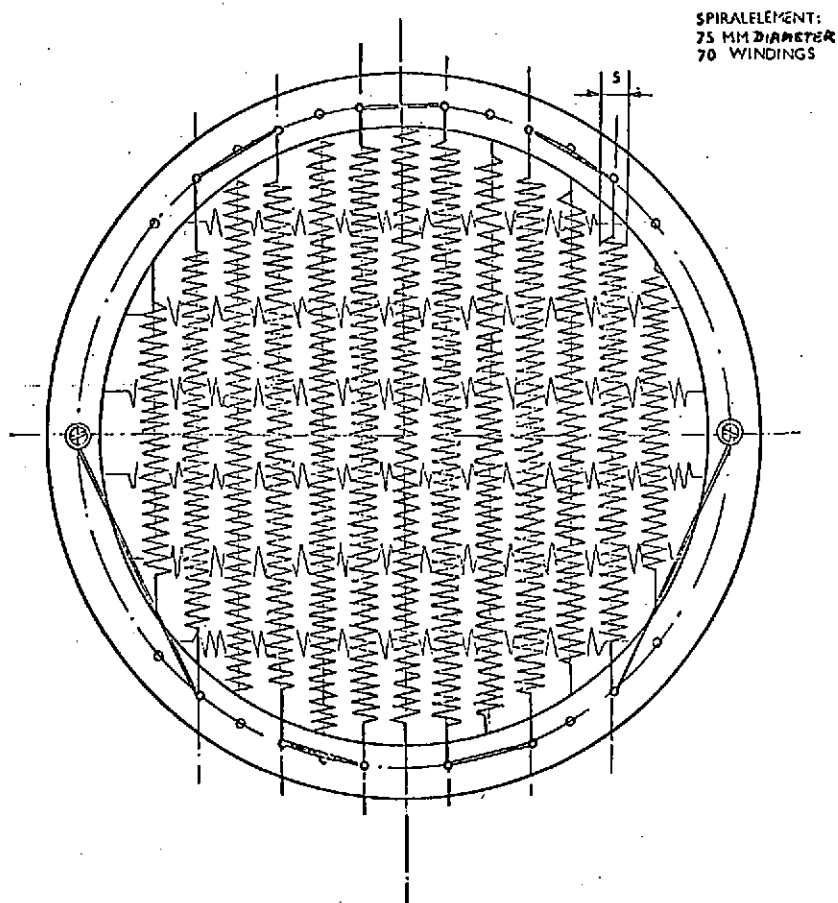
3 KW HEATING ELEMENT (PLAN)
